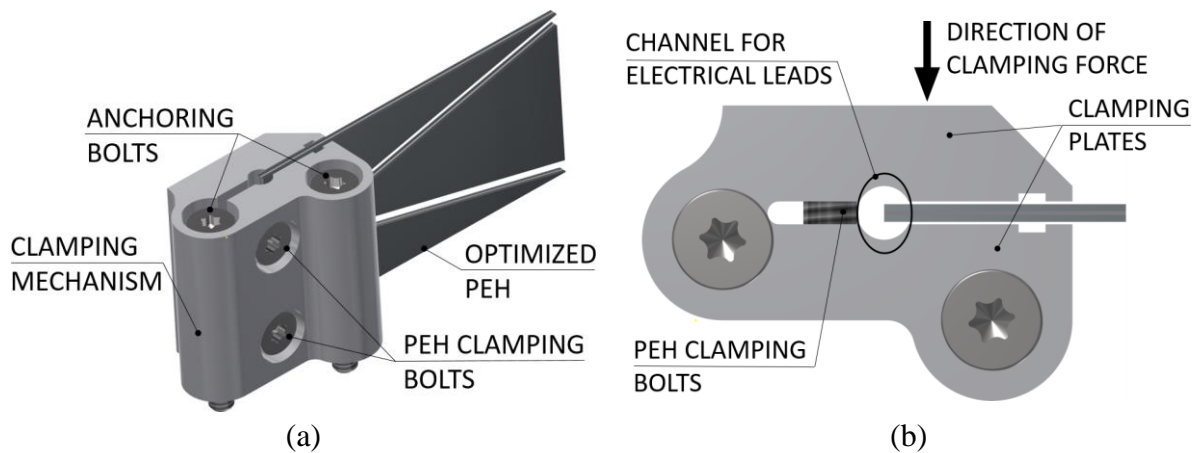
Overall PEH clamping mechanism (a) and its detailed view (b).
